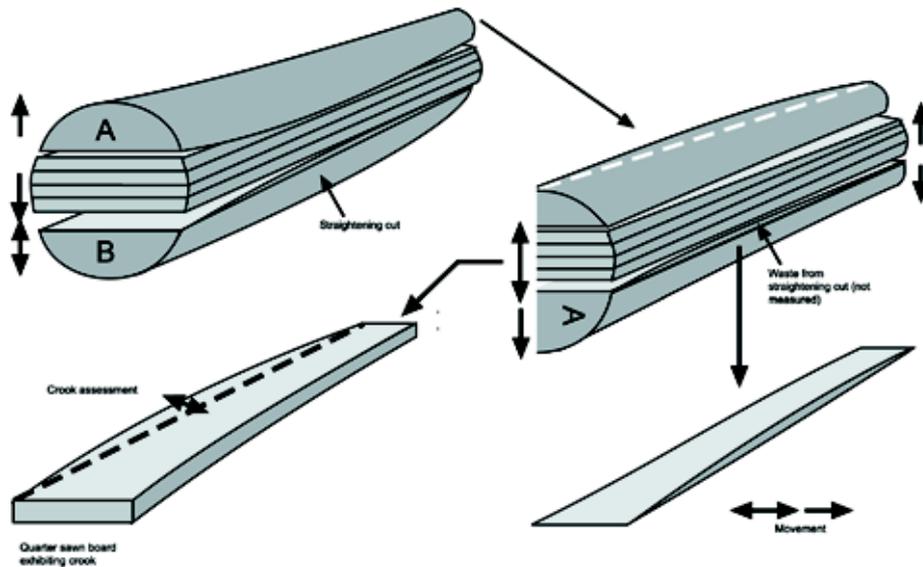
Sawing pattern to produce quarter-sawn boards, and crook assessment method.
